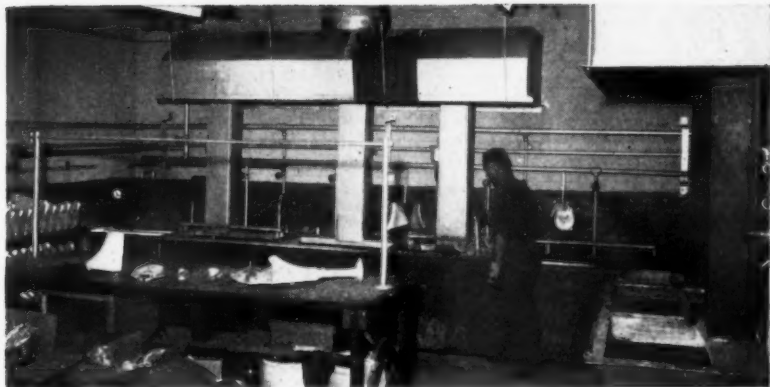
An operator is rinsing an Alodized aluminum die casting. The immersion technique was selected because of its economy in floor space.
